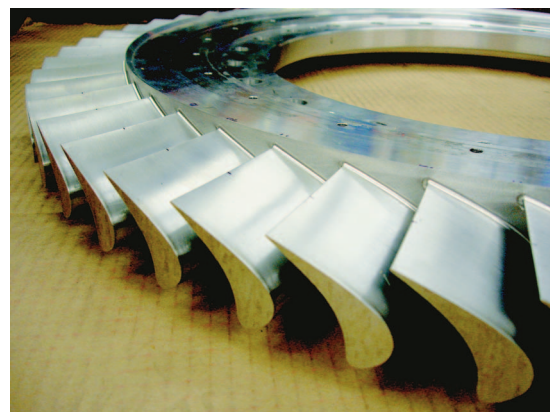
Rotor blisk of the 1.5-stage unshrouded turbine
